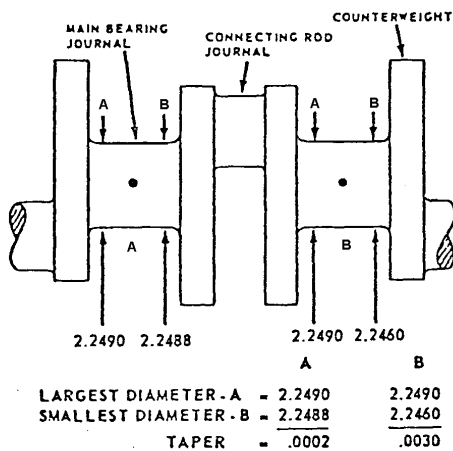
Journal A has only .0002 taper and is O.K.. Journal B Shows a taper of .003, and must be machined.
